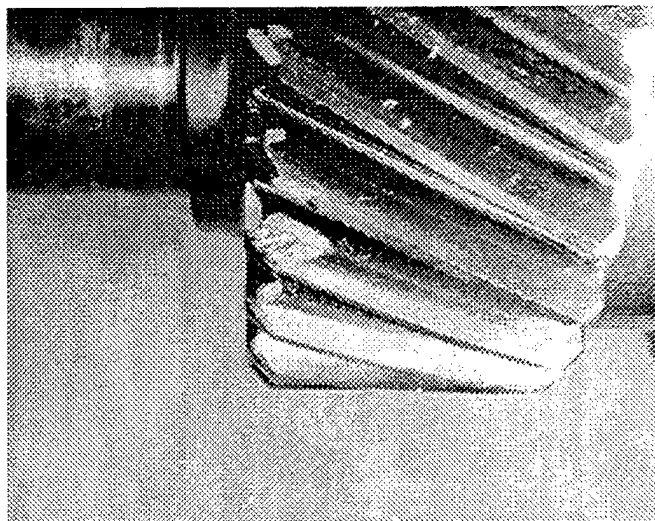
Damage to starboard helical input pinion gear. Gouge or chip is localized to a single tooth near the edge of the mesh.
